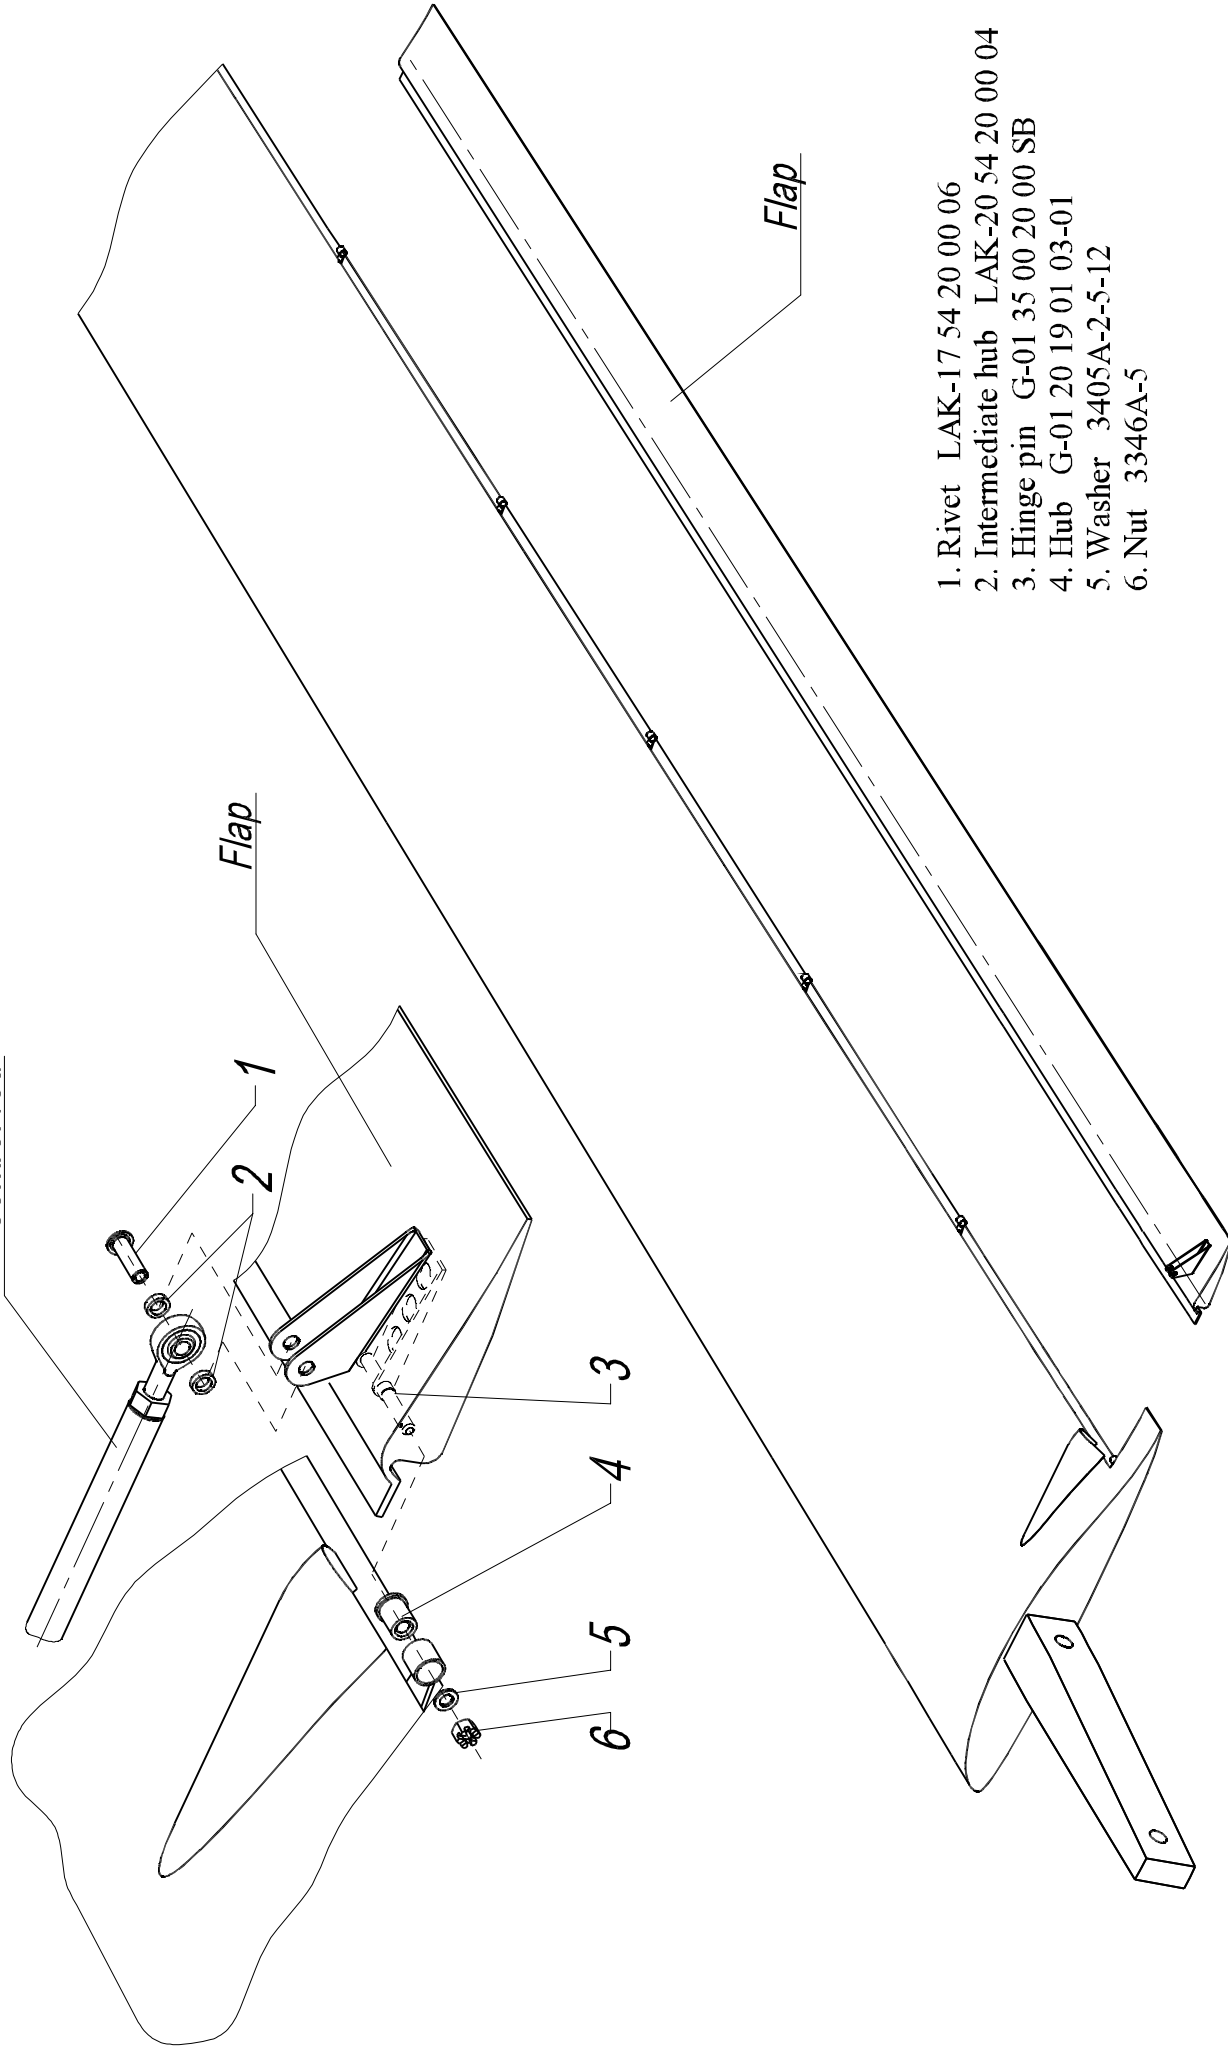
02. Mounting of ailerons of inner wing
